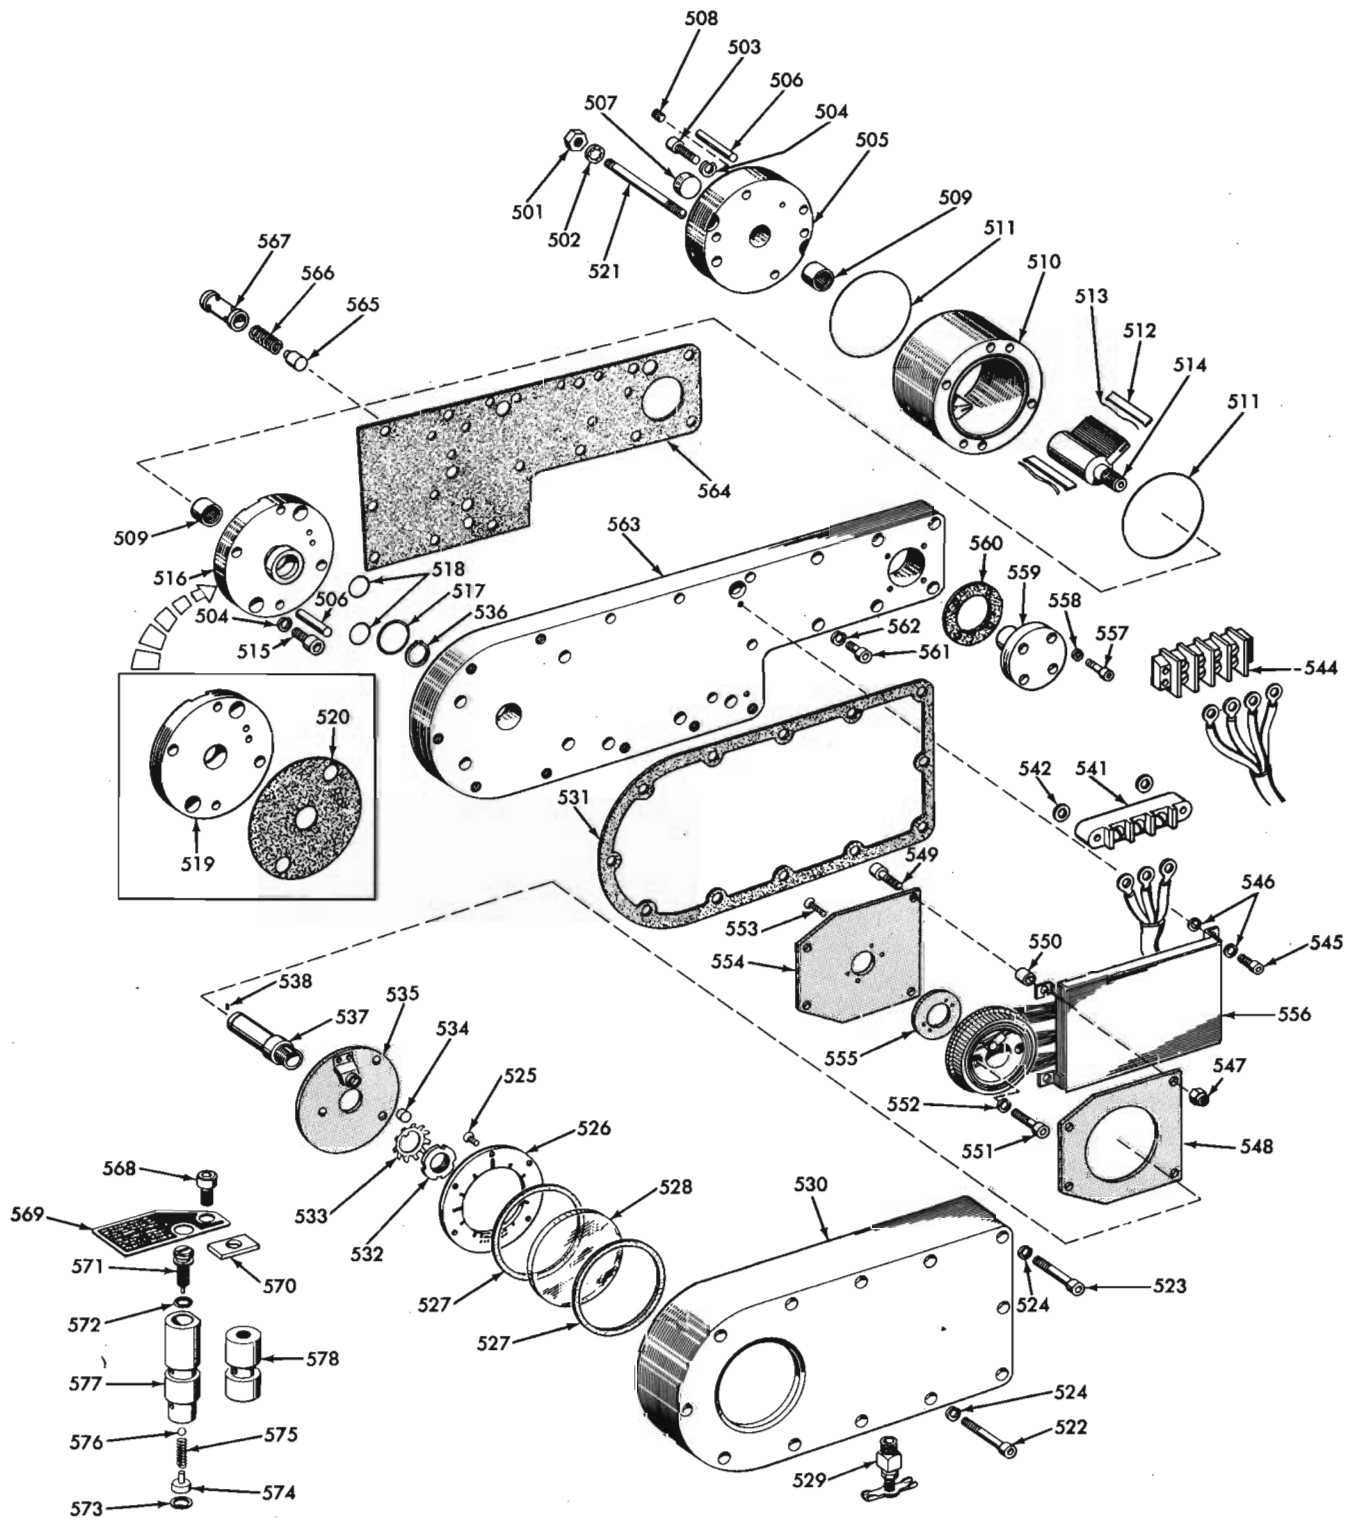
Integral Load Regulator, Load Control Oil Supply Valve, and Adjustable Ball Valves for Column Installation.
